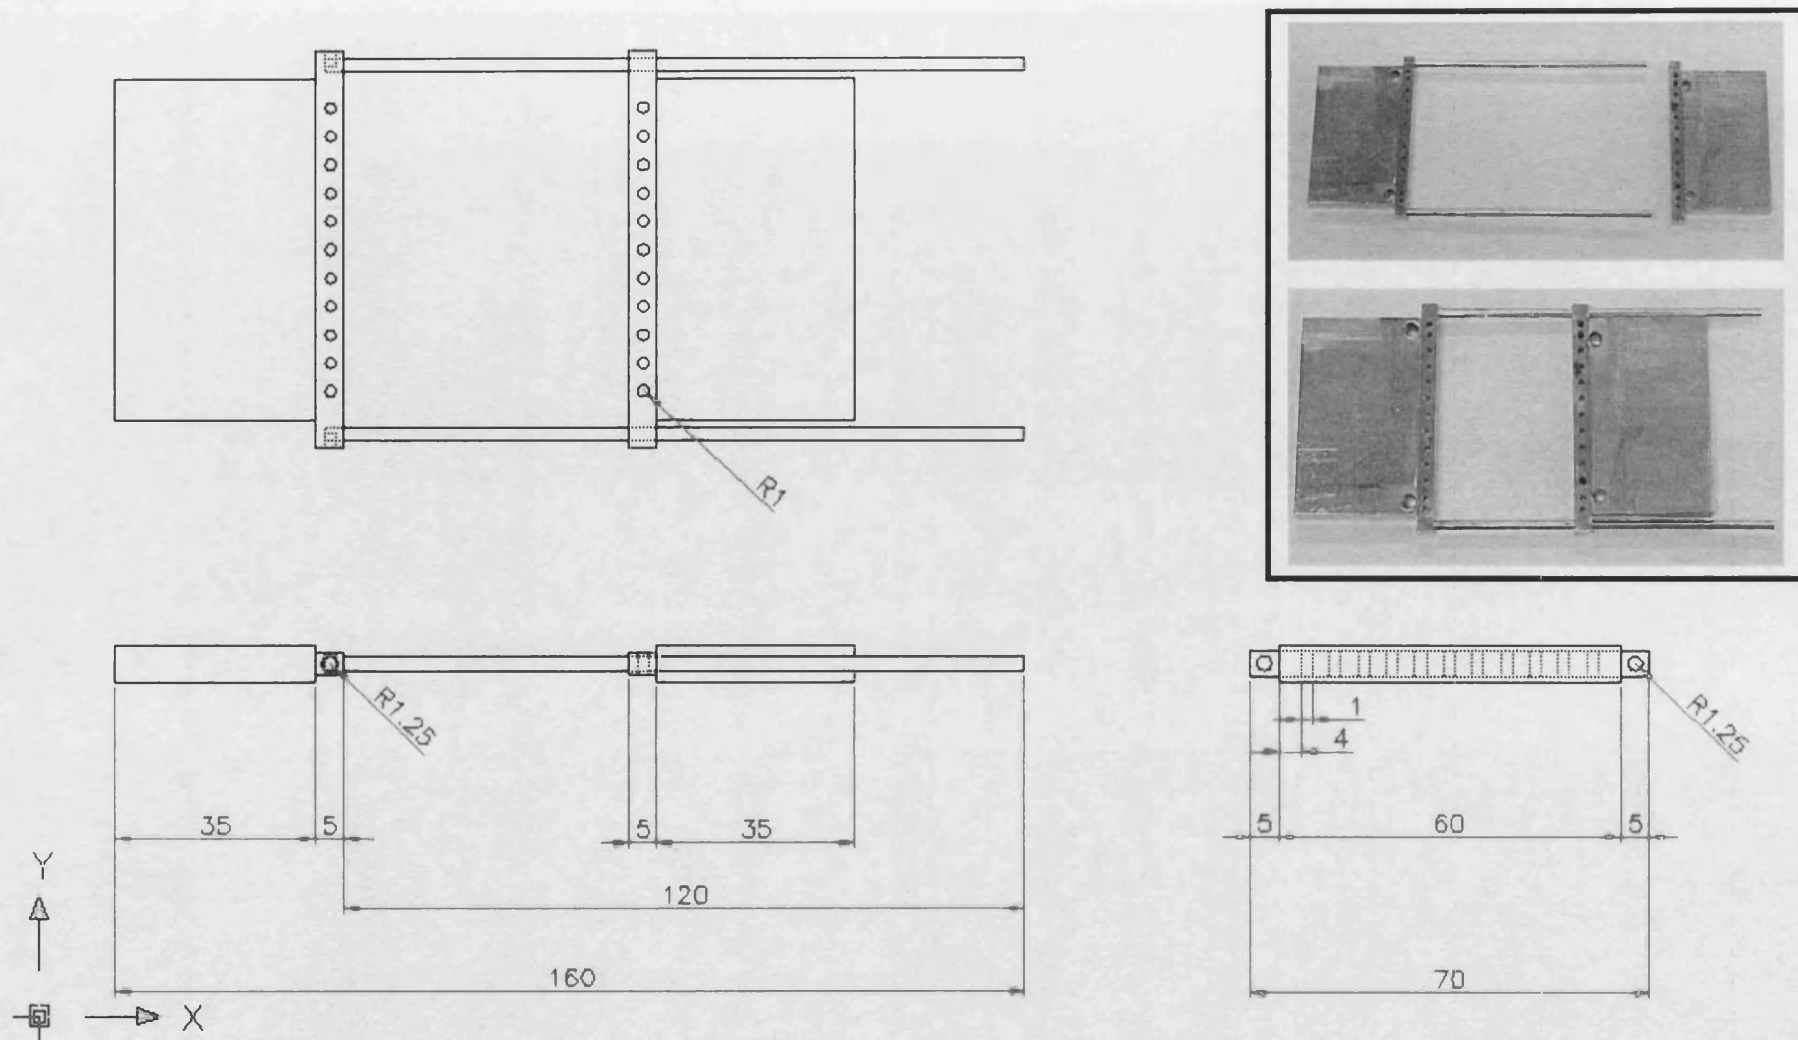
Experimental rig design and measurements (drawn using AutoCAD software). Inset box, shows two pictures of the machined stainless steel rig. All measurements are in millimetres.
